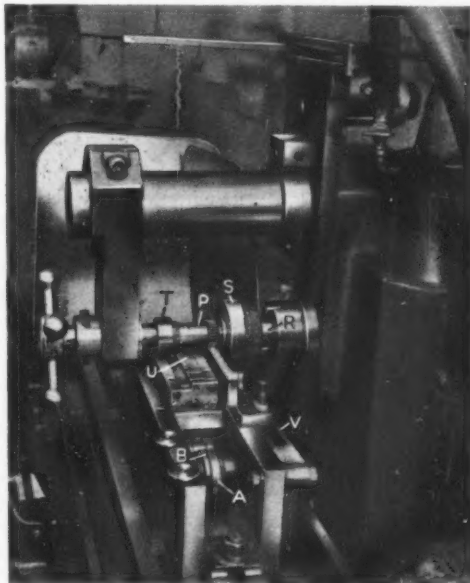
The Set-up on a Specially-equipped Kent Owens Milling Machine for Rolling the 0-020/0-025-in. High Characters on Steel Printing Wheels. A Wheel is Character-rolled in 1 min., the Machine Table Reciprocating Continuously under Automatic Cycle Control
